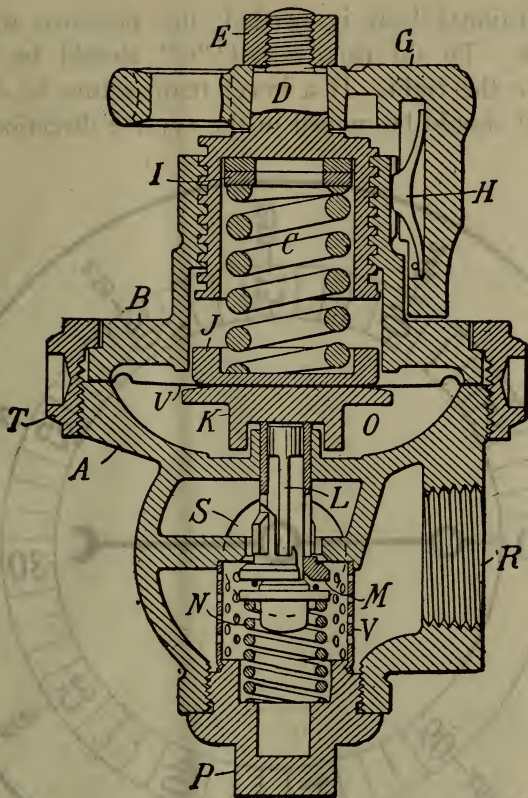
SECTIONAL VIEW IMPROVED TEMPERATURE REGULATOR.
